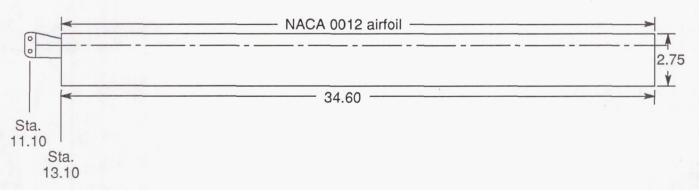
Geometry of -100 and -200 model rotor blades. All dimensions are in inches.
